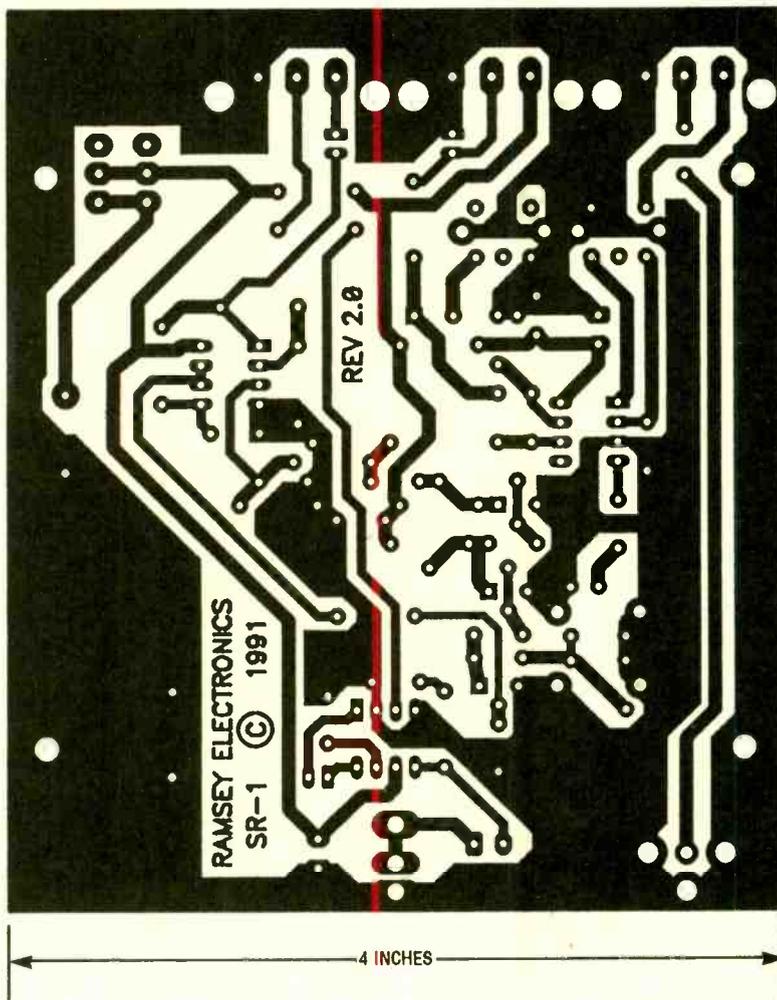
The radio was assembled on a printed circuit board measuring about $4 \times 4\frac{3}{4}$ inches; a full size template of the printed-circuit layout is shown here.
